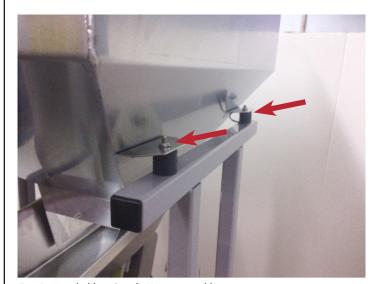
Nuts holding Supply Hopper to rubber mounts
